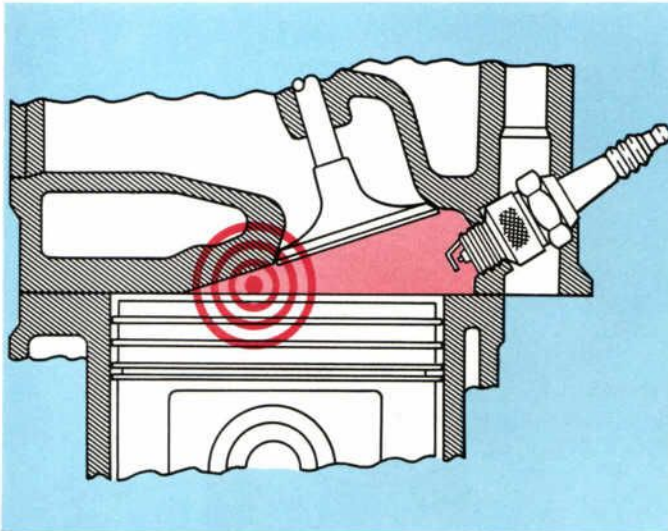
WEDGE-SHAPED COMBUSTION CHAMBER
